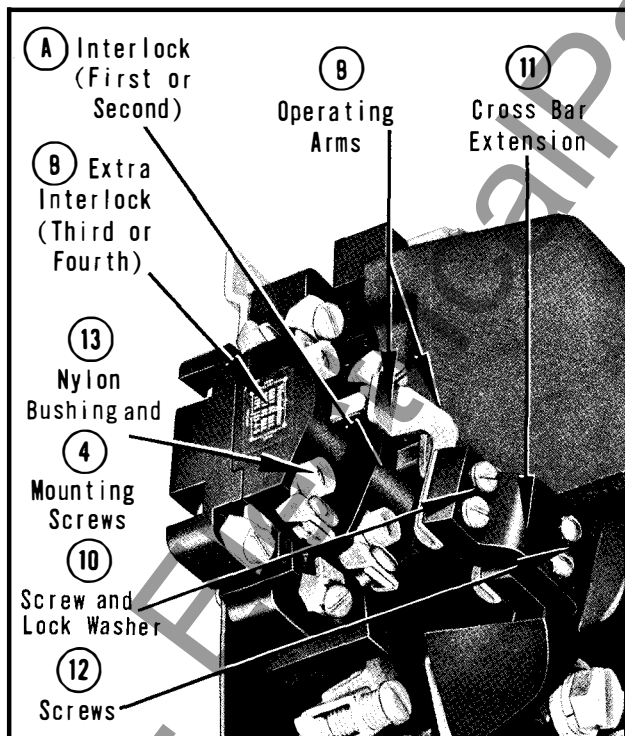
Mounting of Extra Universal Interlocks on Size 0 Life-Line Starter
